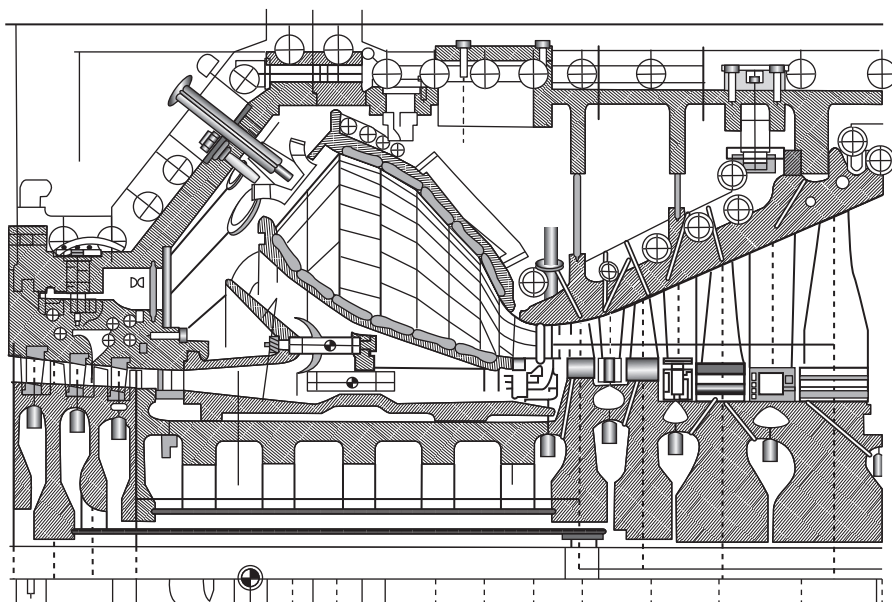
A typical industrial-type DLE/DLN annular combustor (Courtesy: Siemens Corp.).
